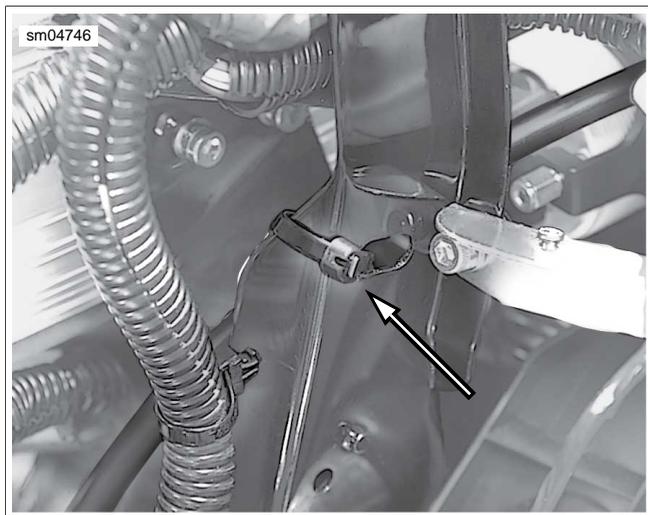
Secure Clutch Cable to Fairing Bracket
